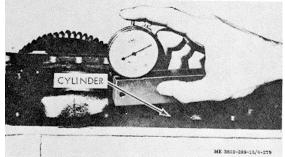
Cylinder liner counterbore inspection.
